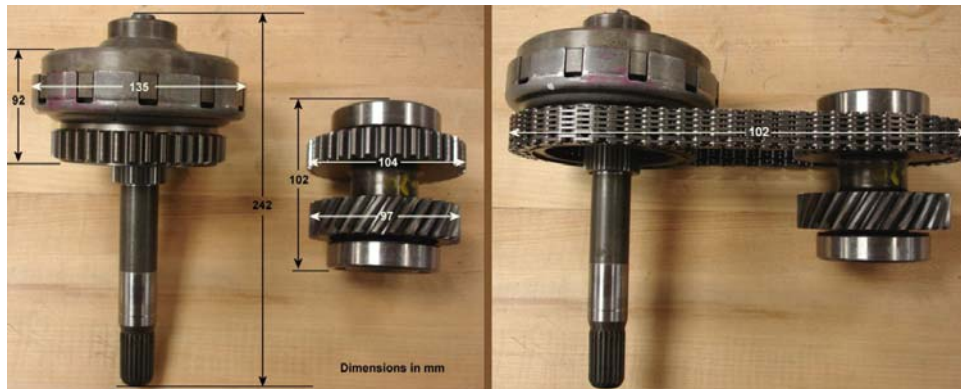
Dimensions for planetary gear, the first reducer gear, and extension.
